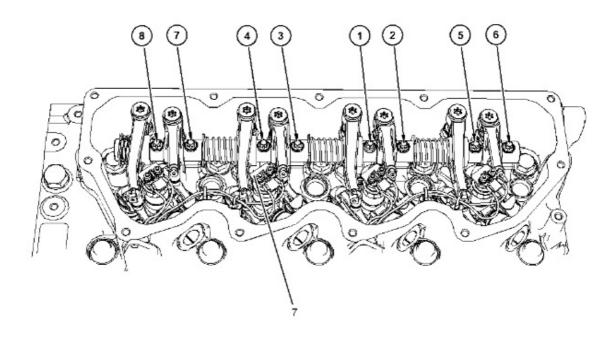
Sequence for tightening the bolts for the rocker shaft assembly g03703575
